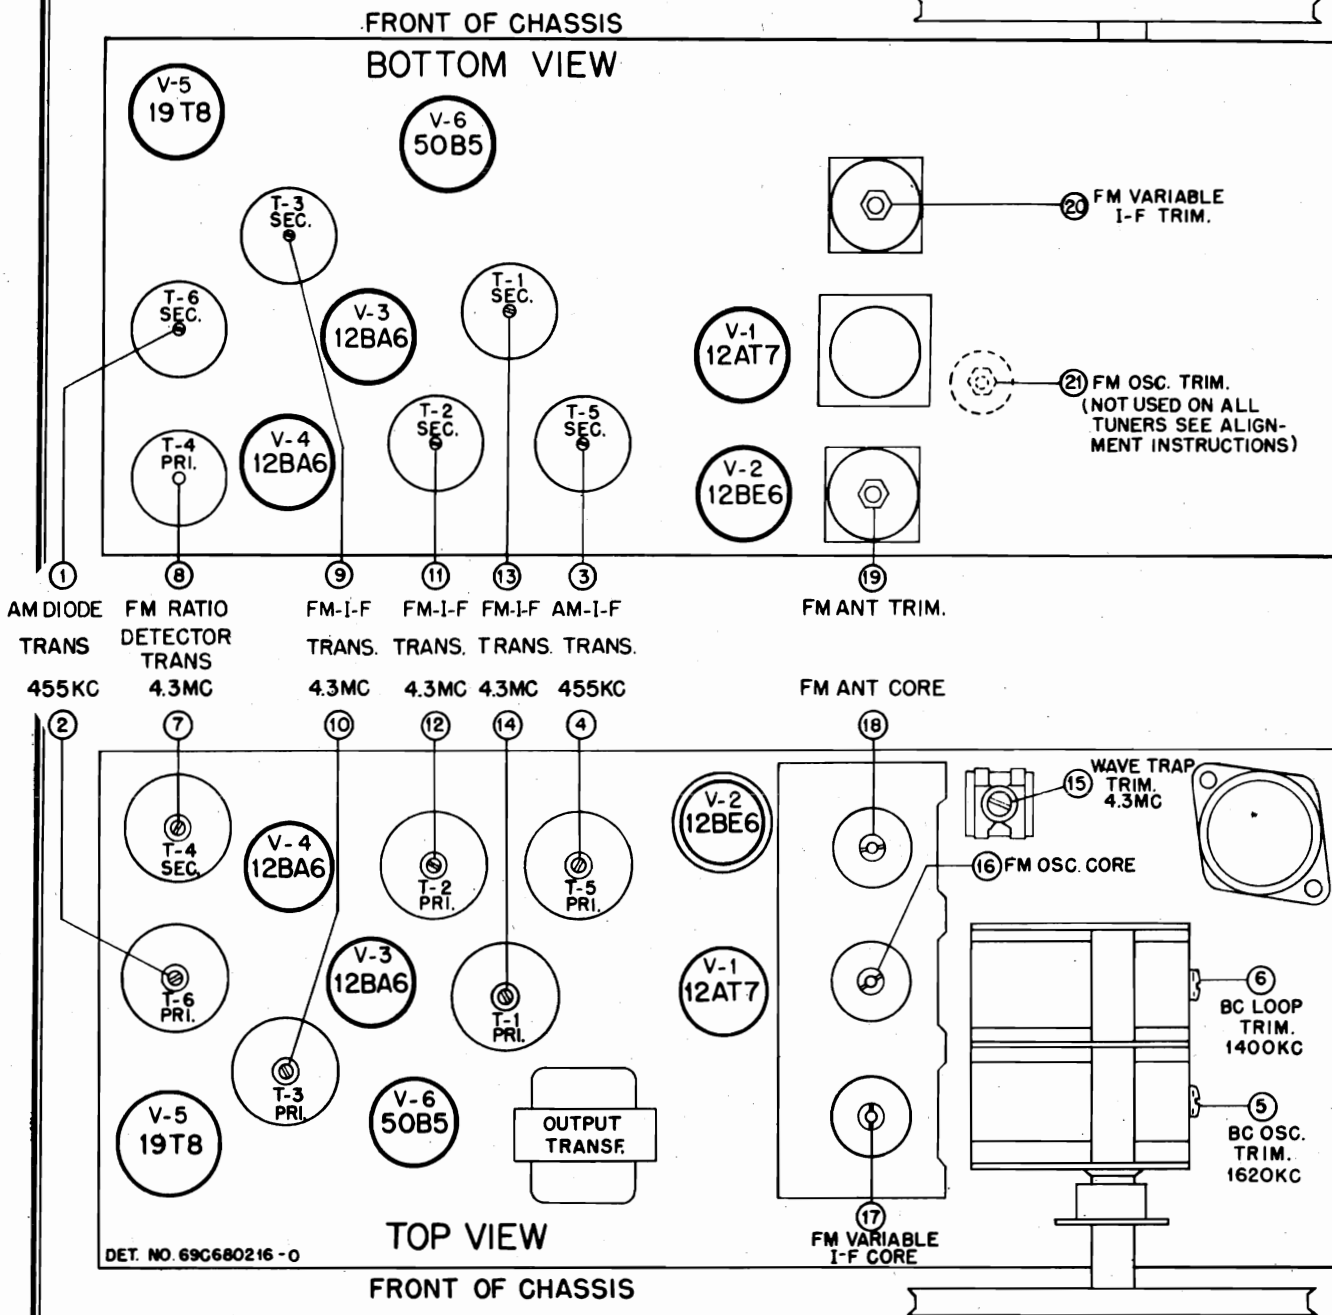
CHASSIS HS-128 & HS-132 TUBE & TRIMMER LOCATIONS
